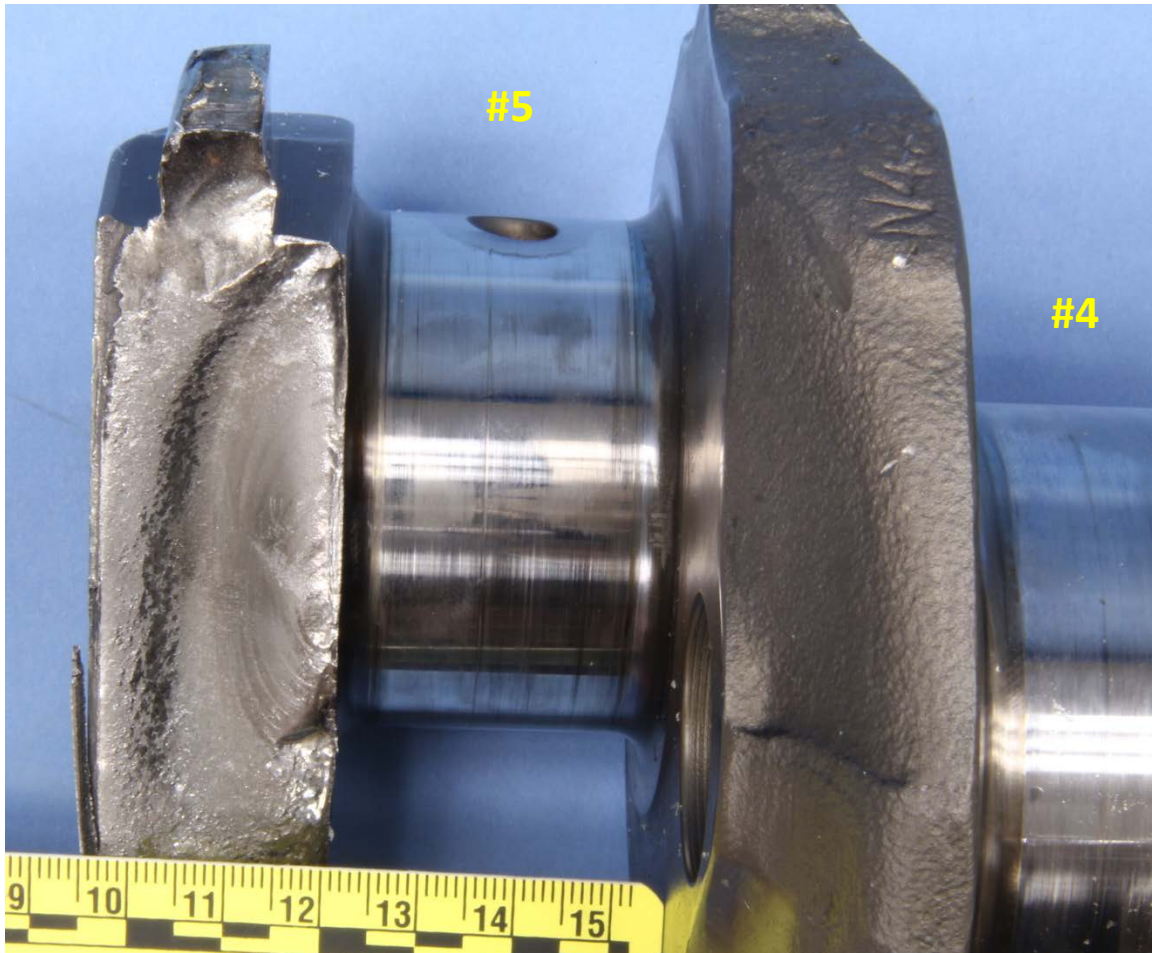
Close-up photo of the #5 connecting rod journal on the crankshaft.
